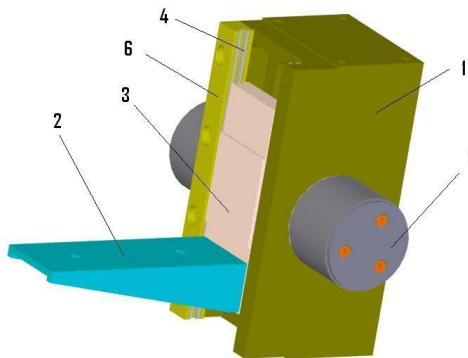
Mouvement after Y axis: 1- Stage body Y; 2- Support platform; 3- Guide element after Y; 4- Worm gear; 5- Drive handle; 6- Guided element after Y axis
